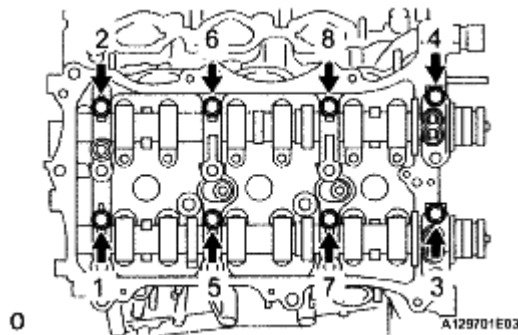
Identifying Bearing Cap Bolts Loosening Sequence
